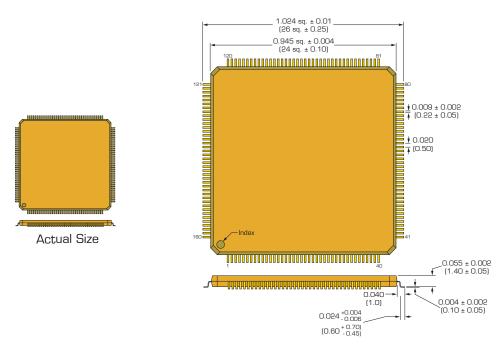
M3000F LQFP-160 Dimensions, Quad Package Top View
